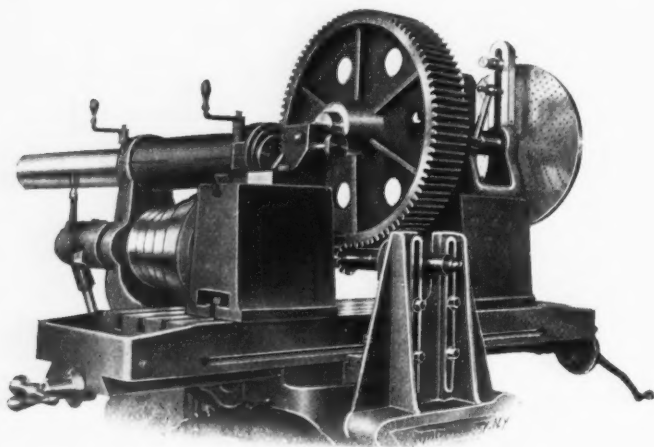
Attachment for cutting Gears of Large Diameter on Cincinnati Milling Machines.
